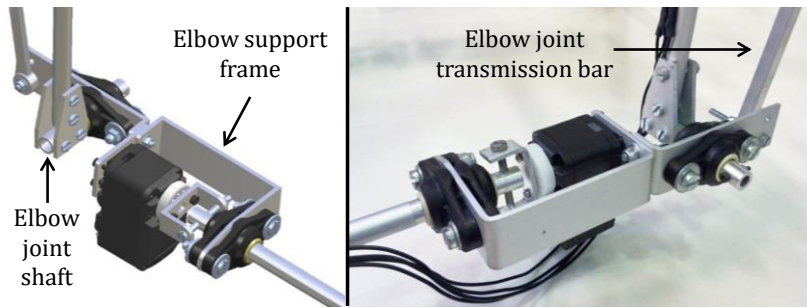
Detailed view of the elbow joint mechanism and the wrist yaw servo. Radial loads exerted at the end effector are catch by the pair of igubal EFOM-08 bearings and supported by the aluminium frames.
